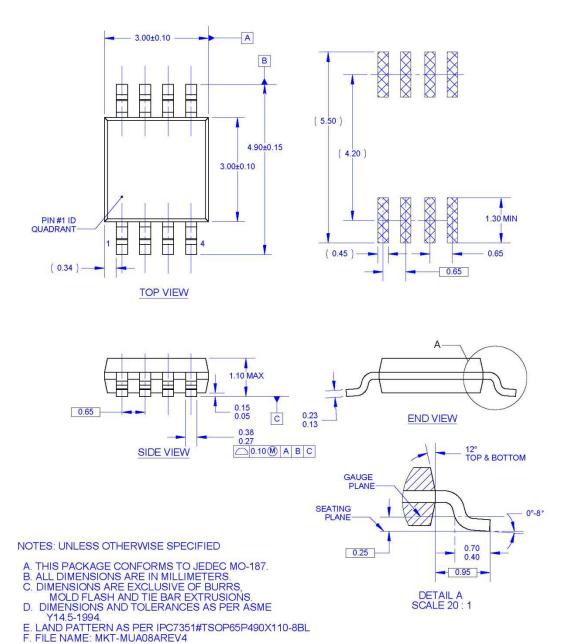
8-Lead Molded Small Outline Package (MSOP)
